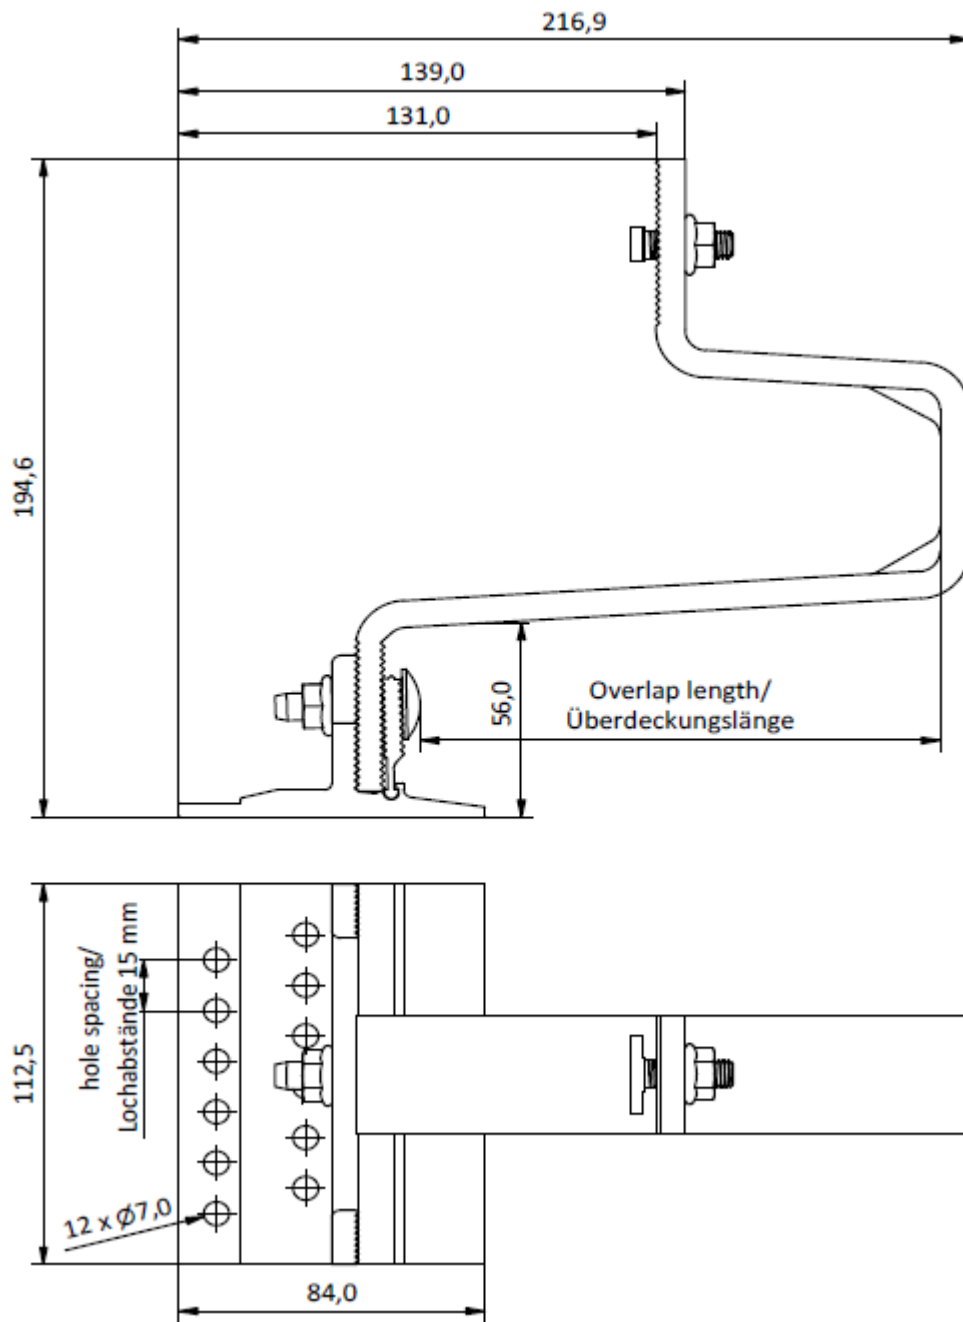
Dimensions in mm of "SOL Solarhalter 112-7-56 XL 8 mm"
